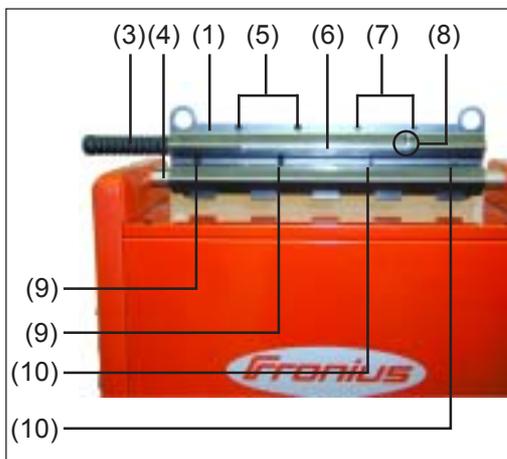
Fix the handle plates and handle tube with "Extrude-Tite" screws
